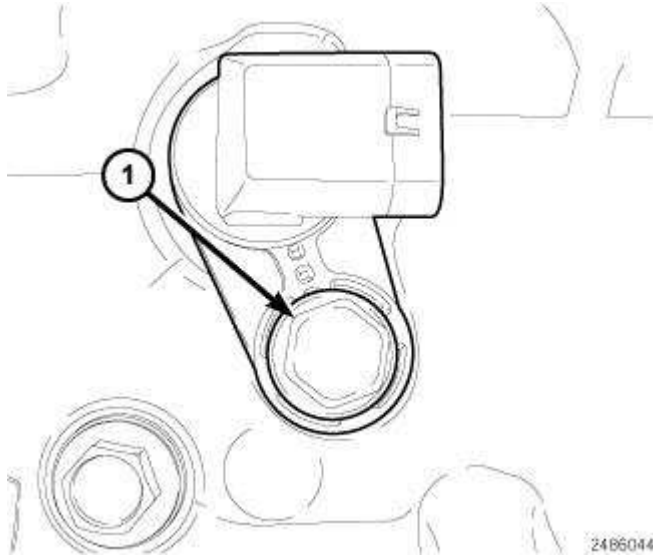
Crankshaft Position Sensor Mounting Bolt
